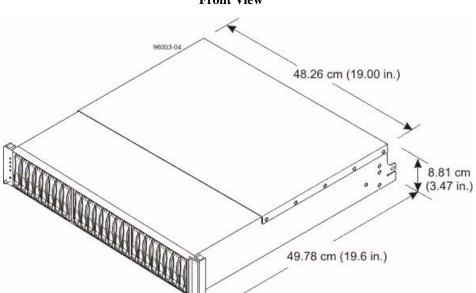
Dimensions of the E5500 Controller-Drive Tray (24-Drive Model) – Front View
